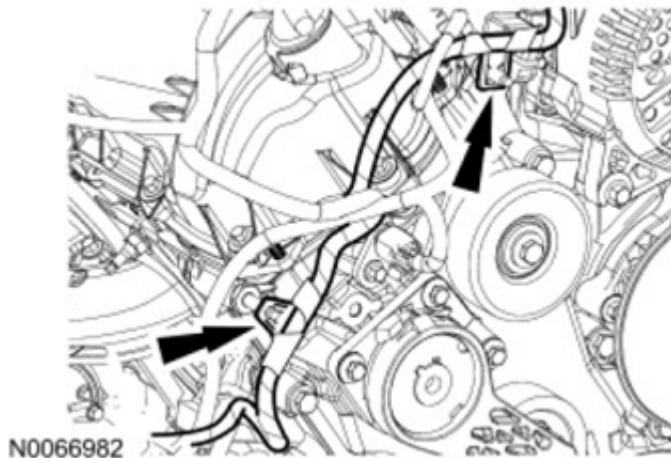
Locating Generator Wiring Harness Position Retainers And Engine Front Cover Studs
